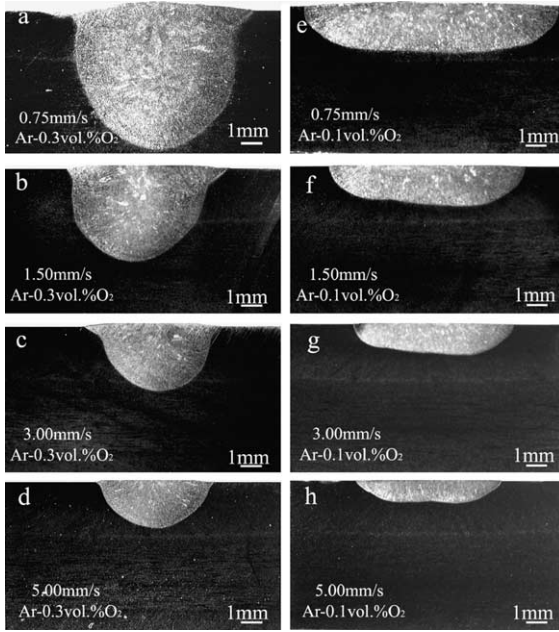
Weld shapes at different welding speeds for Ar–0.3vol%O₂ and Ar–0.1vol%O₂ shielding gases.
